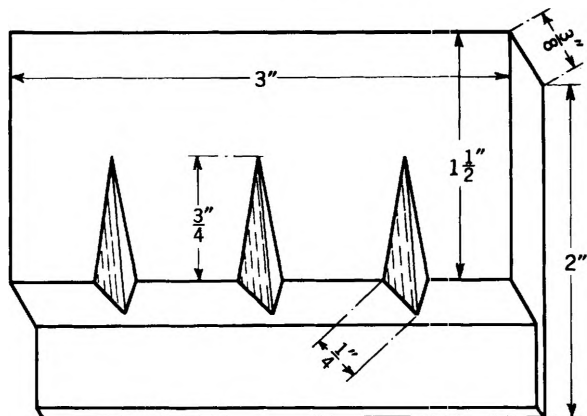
Stainless Steel Cone Mold for Making Ash Cones.
